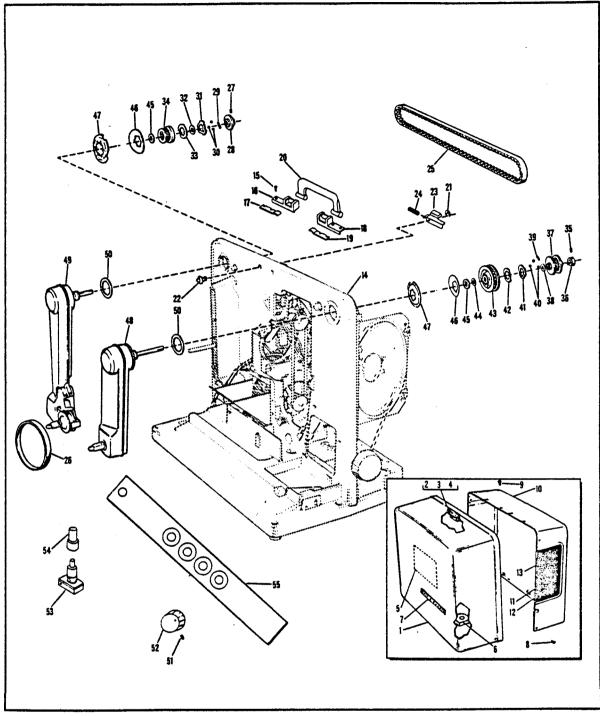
Filmosound Projector Main Plate Exploded (Sheet 1)
